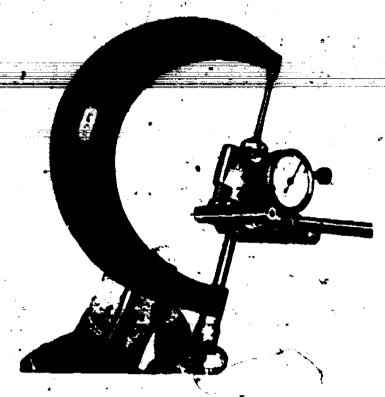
Checking Cylinder Bore With Gauge and Outside Micrometer.
